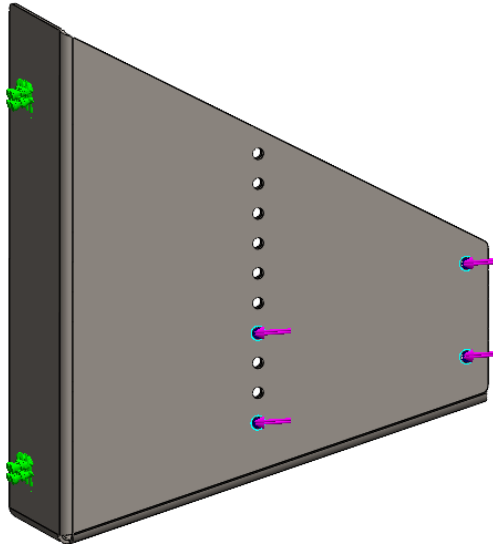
BRACKET 4 FIXTURES AND LOADING CONDITIONS.
